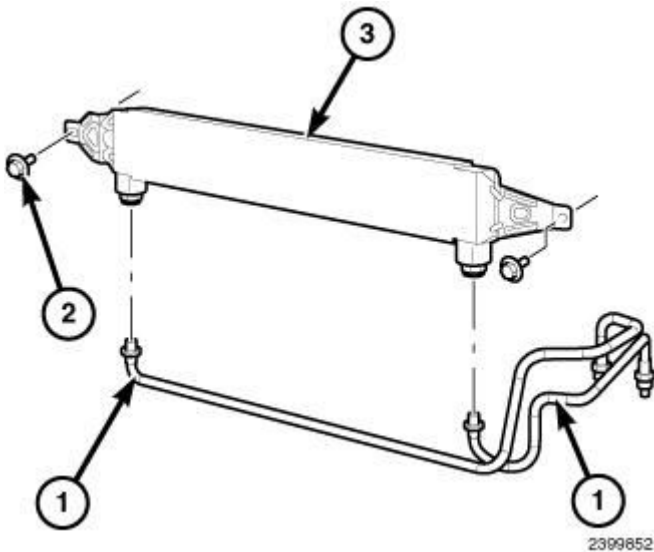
Transmission Cooler Lines And Transmission Oil Cooler
